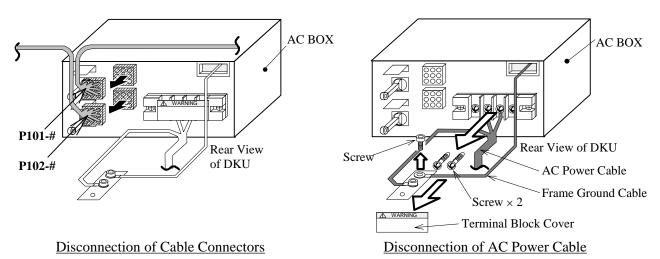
Disconnection of Cable Connectors and AC Power Cable
